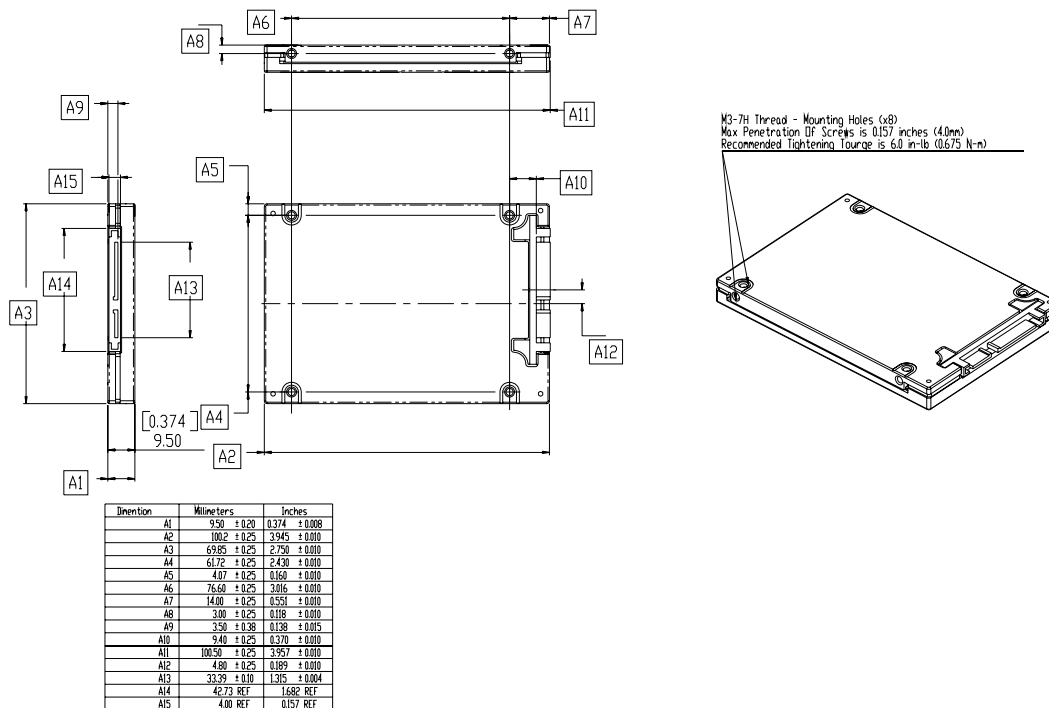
SanDisk SSD SATA 5000 2.5" Mechanical Drawing
